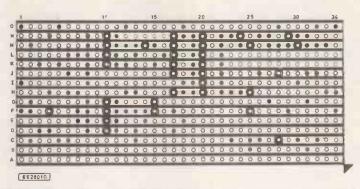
Stripboard component layout and details of breaks required in the underside copper tracks.
